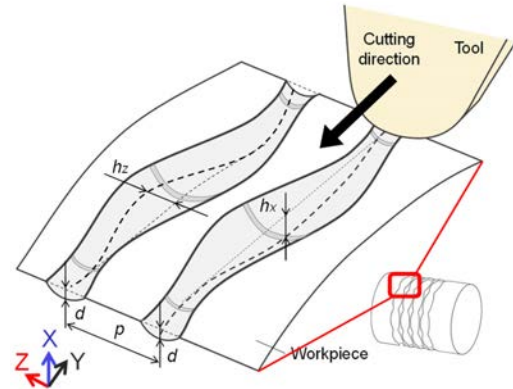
Schematic of design parameters for compound (C) wavy groove cutting.
